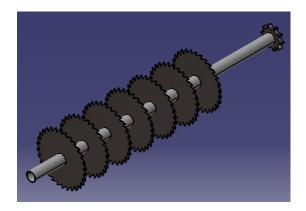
Upper Shaft Blade CATIA Part Model.
